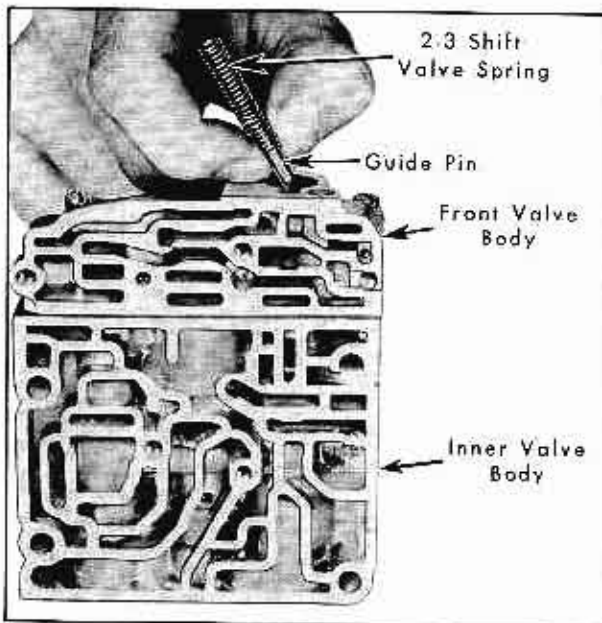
Installing 2-3 Shift Valve Guide Pin, Spring and 1-2 Regulator Plug Spring
